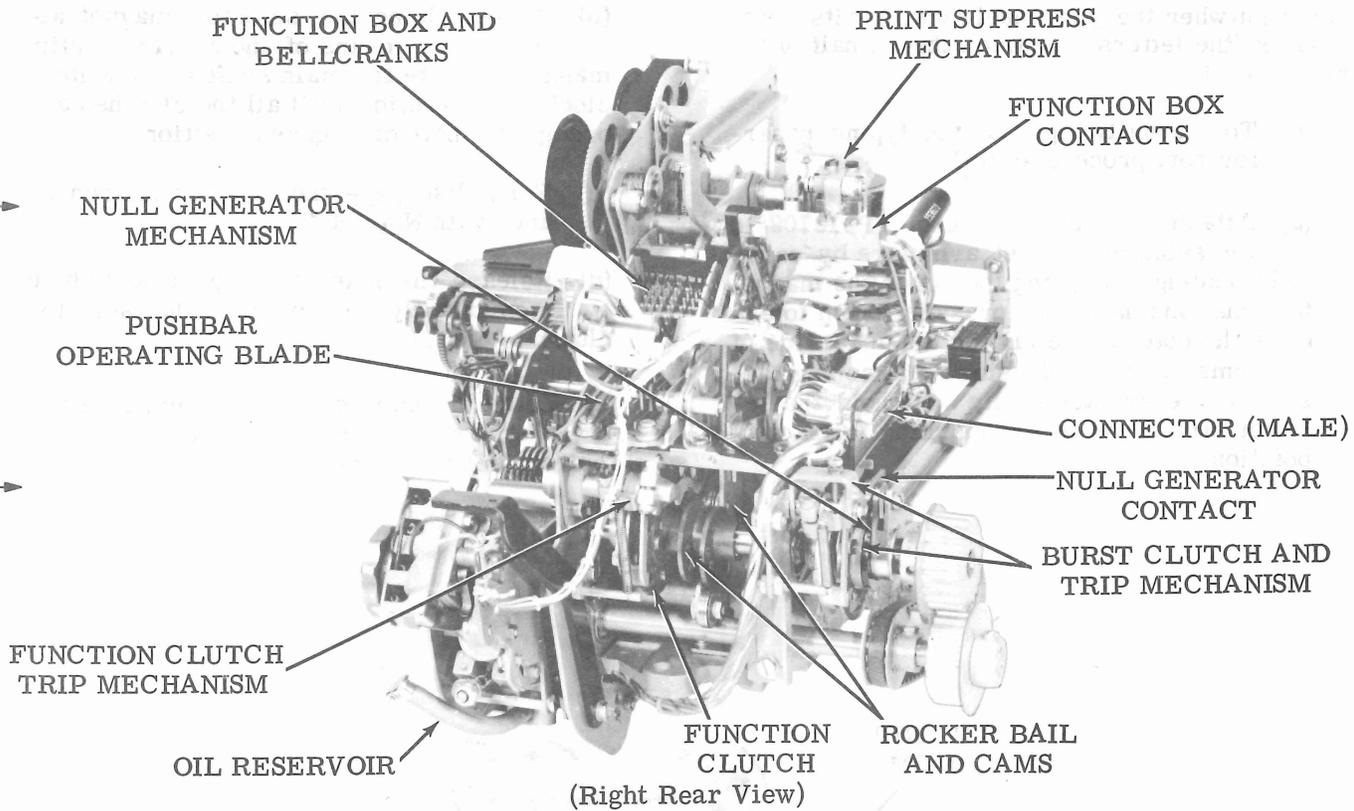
35 Edge Punched Card Typing Reperforator (Without Top Plates)
